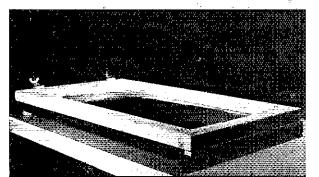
The register margins prepared from heavy art paper fastened to the back board with double-sided adhesive tape, A copper-clad board is shown in place, ready for printing.
